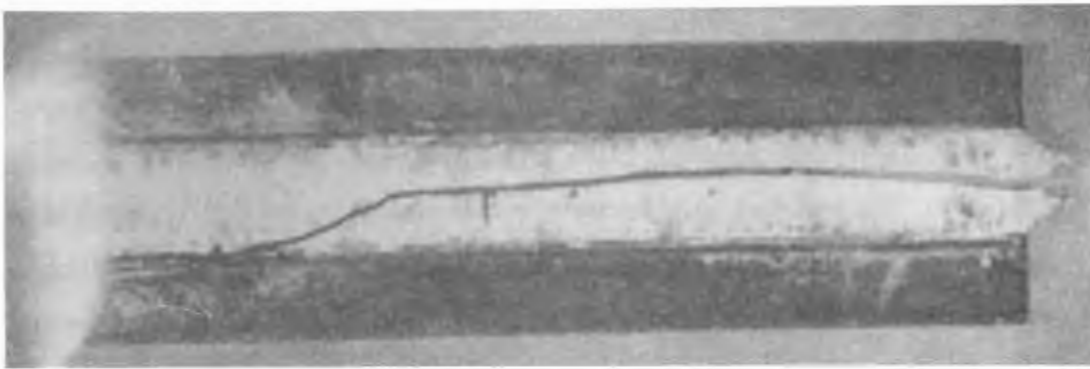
Robertson test on a wide plate. Note crack deviates in zone where local heating was applied.
